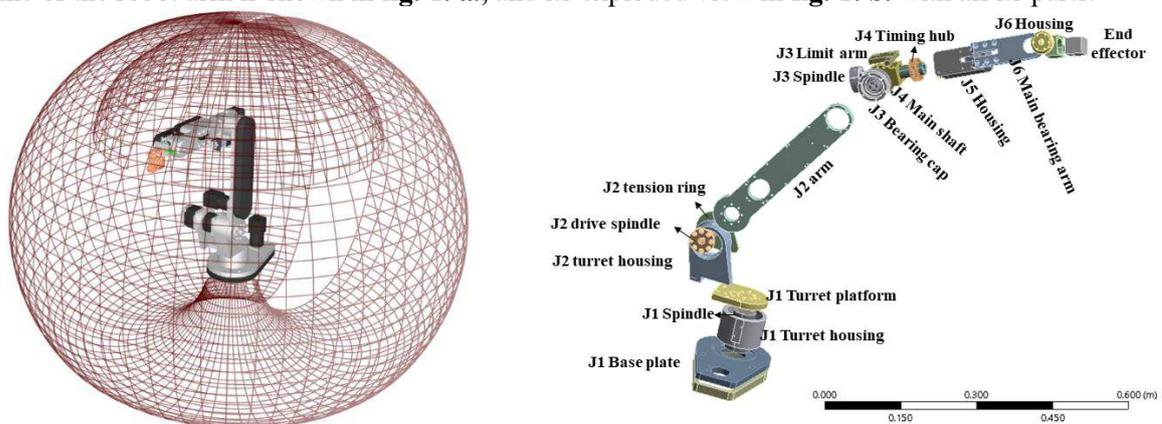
a. AR3 robot workspace visualization, 1. b. Exploded view of the assembled robot arm
